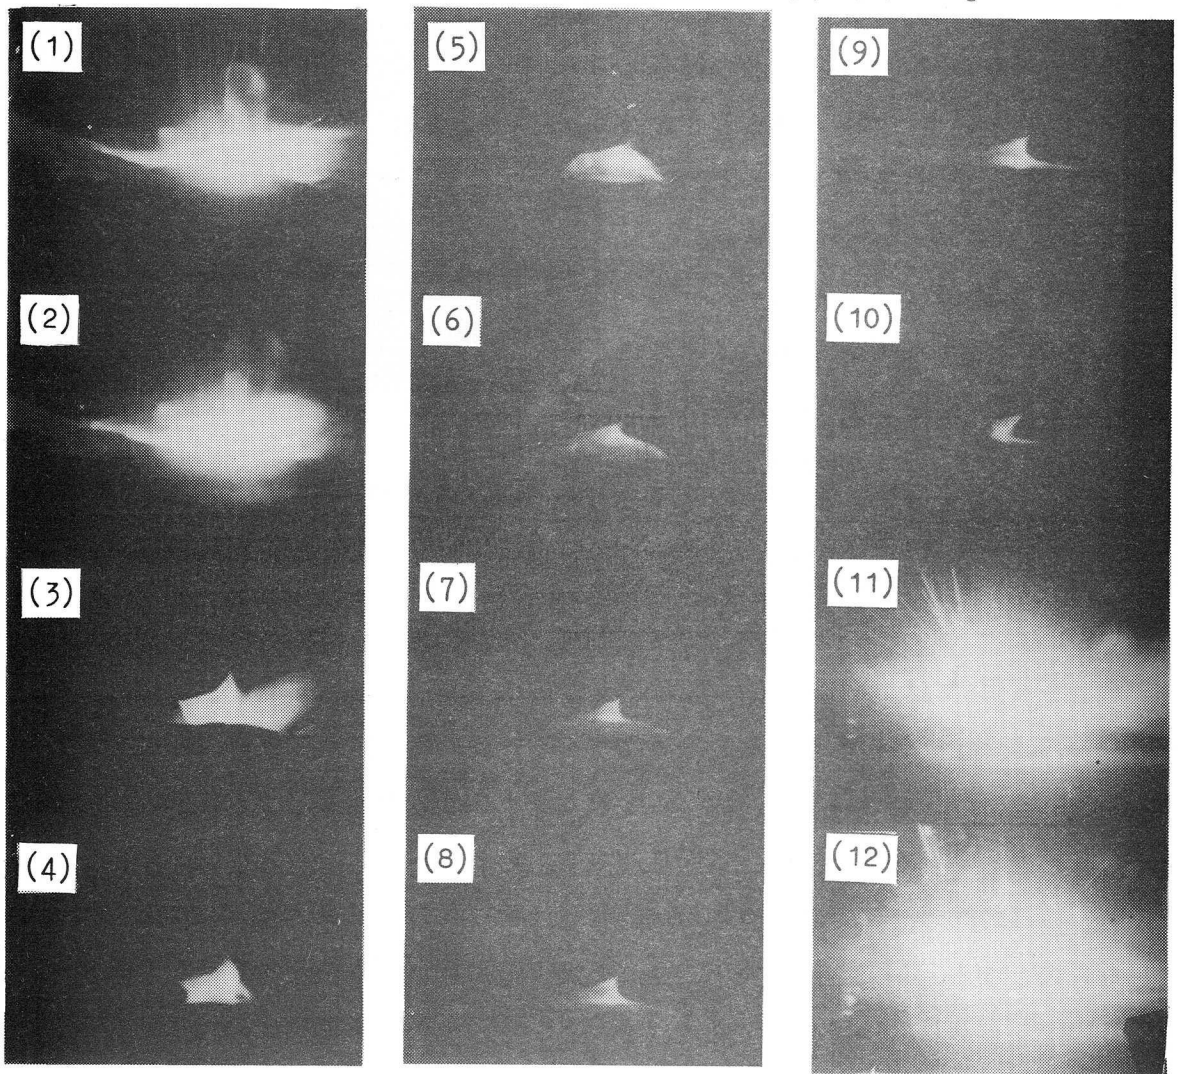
High-speed motion photograph (1000 frames/s) under short circuiting transfer in CO₂ arc welding.
